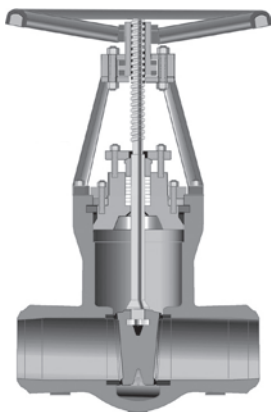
B-S Parallel Slide Disc, Butt Weld Ends
